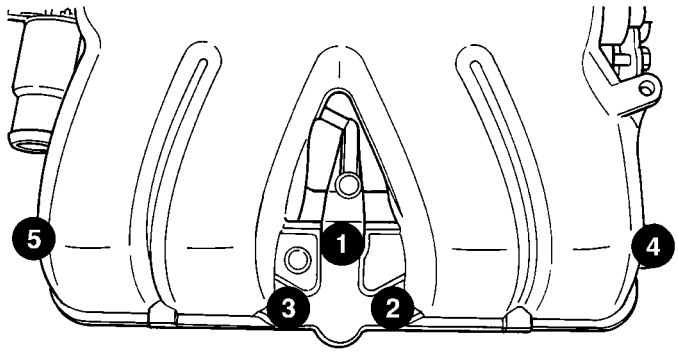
Upper Intake Manifold Tightening Sequence - 2.4L
